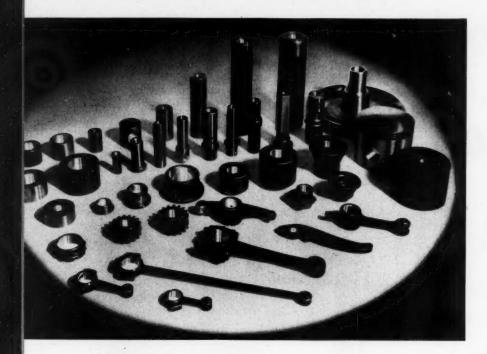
Left—Group of precision machine parts with surfaces finished by Microhoning
